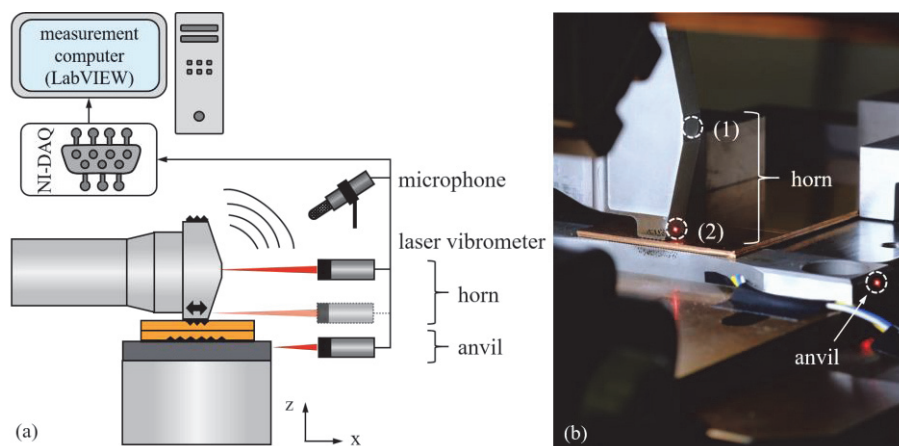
(a) Schematic illustration of measurement setup and (b) zoomed-in view showing the measuring positions on horn and anvil during copper sheet welding
